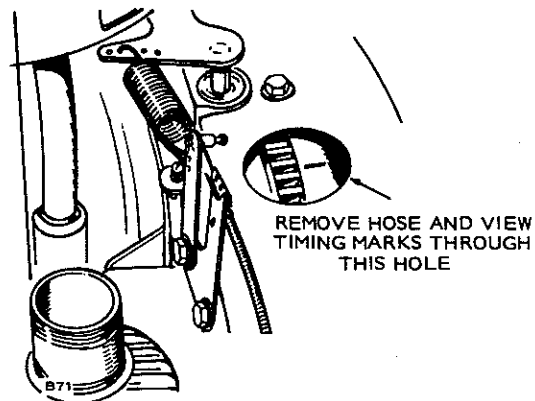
BF-BG FLYWHEEL TIMING HOLE
